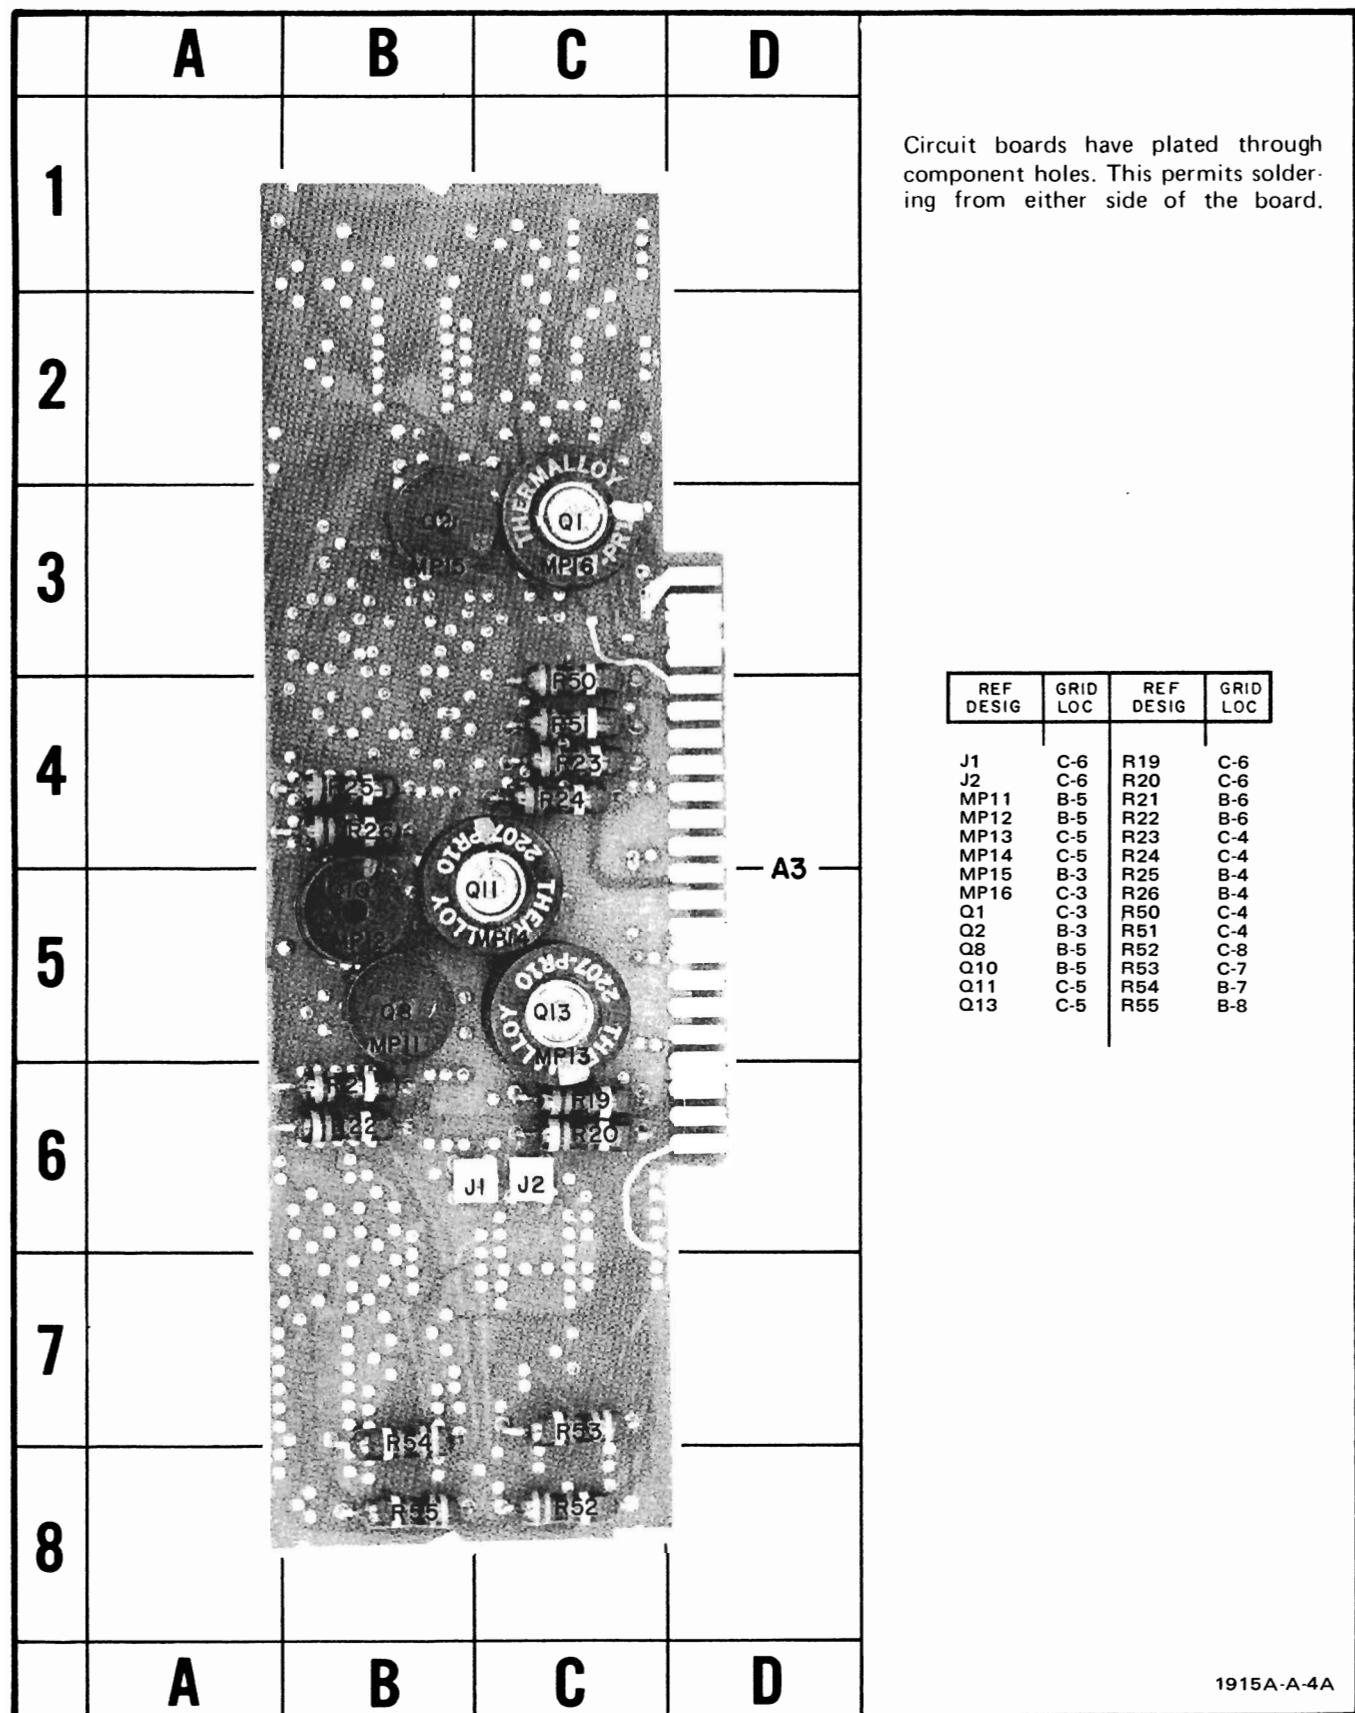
Negative Output Assembly, A3, Component Identification (Rear View)
